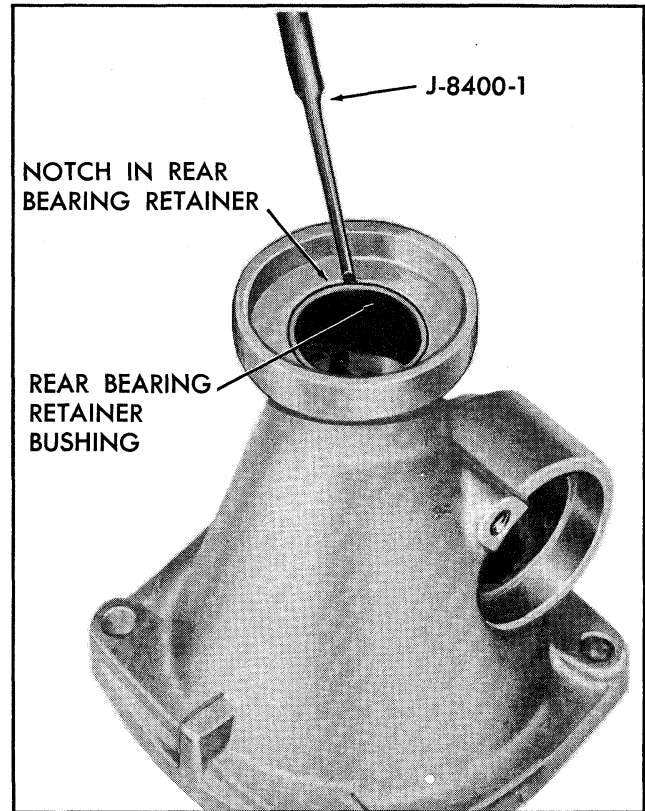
B-32 Removing Rear Bearing Retainer Bushing
